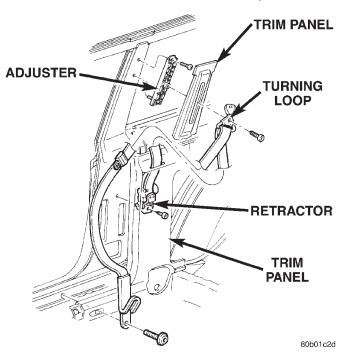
Front Shoulder Belt—2-Door Vehicles
